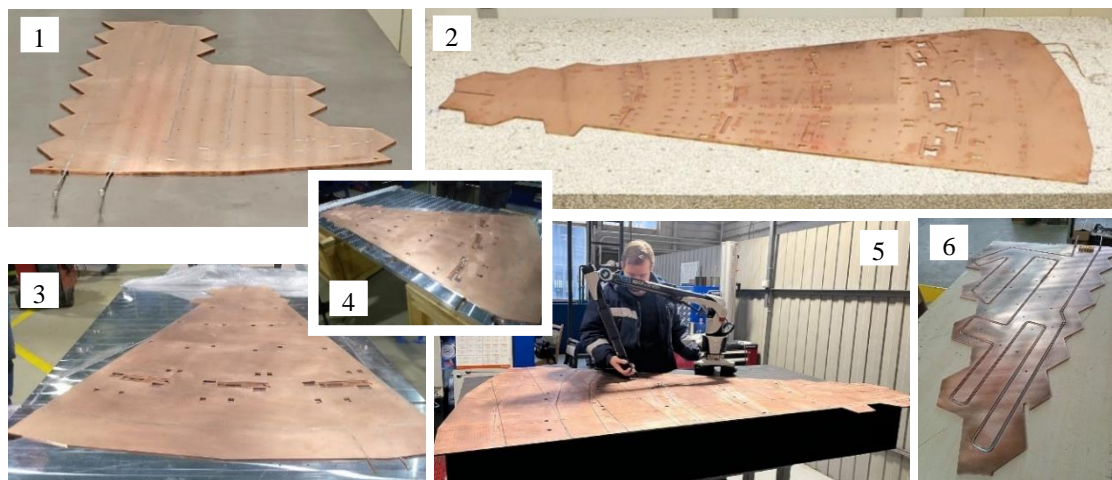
HGCal CE-H cooling plate prototypes manufactured: 1 – small L29-B (late 2020), 2 – large L49-D (early 2021), 3–4 large pair L49-D и L49-D-inversed (late 2021), 5 – automatic soldered large L49-D (late 2022), 6 – press fitted small prototype L29-B (late 2022).
